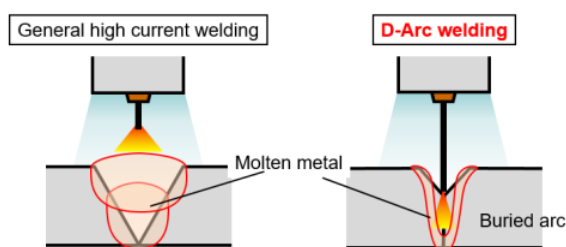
The difference in groove preparation between classical high current welding and D-Arc welding.
